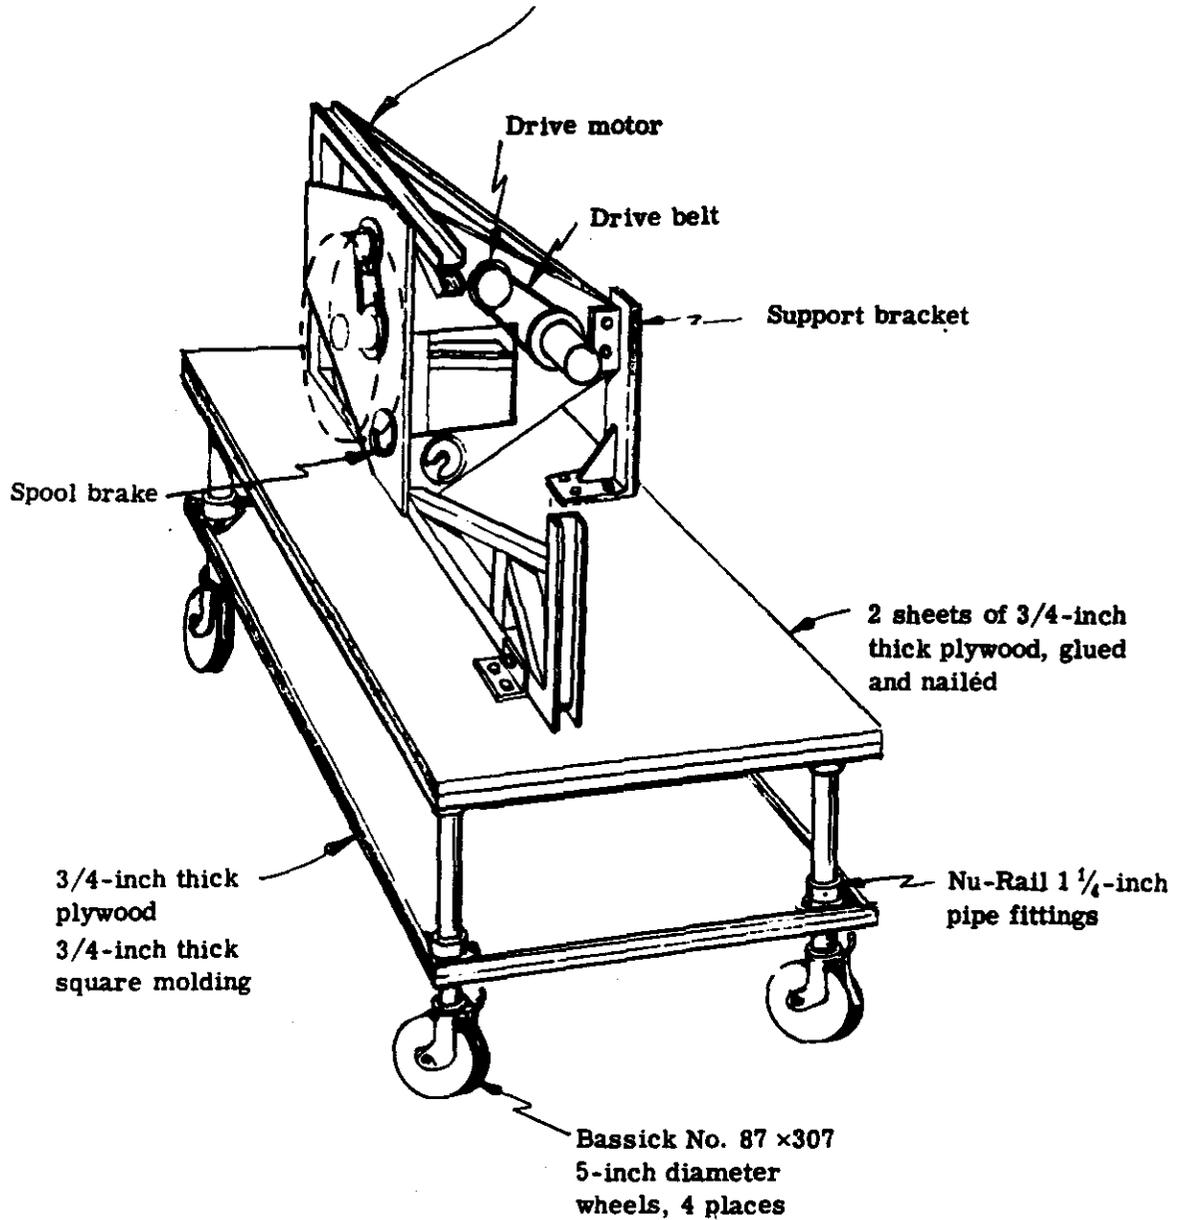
Film supply cassette assembly fixture and dolly
